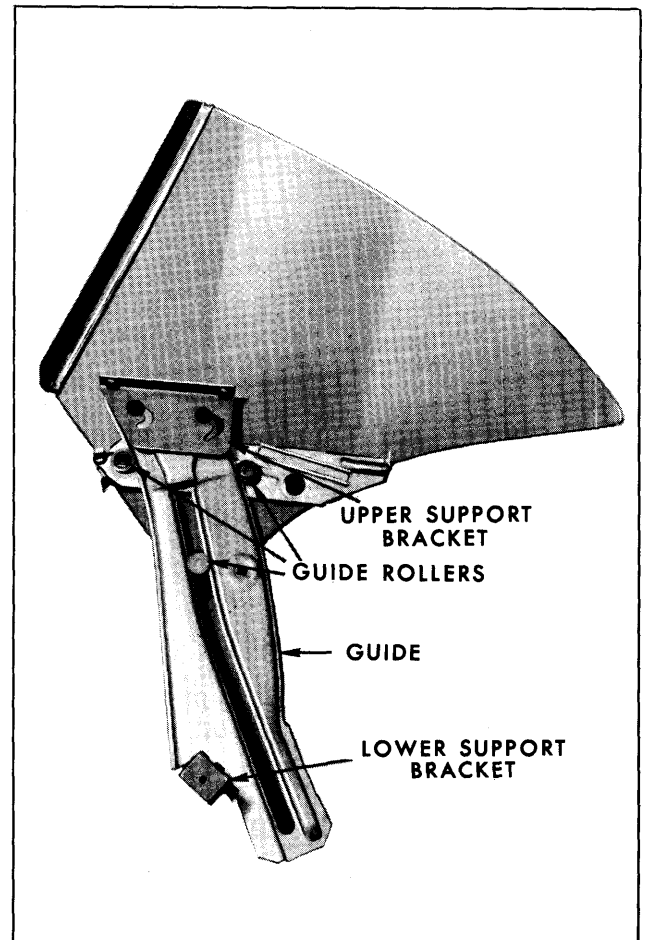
Rear Quarter Window and Guide Assembly "A - 37, 67, 87" - Styles
